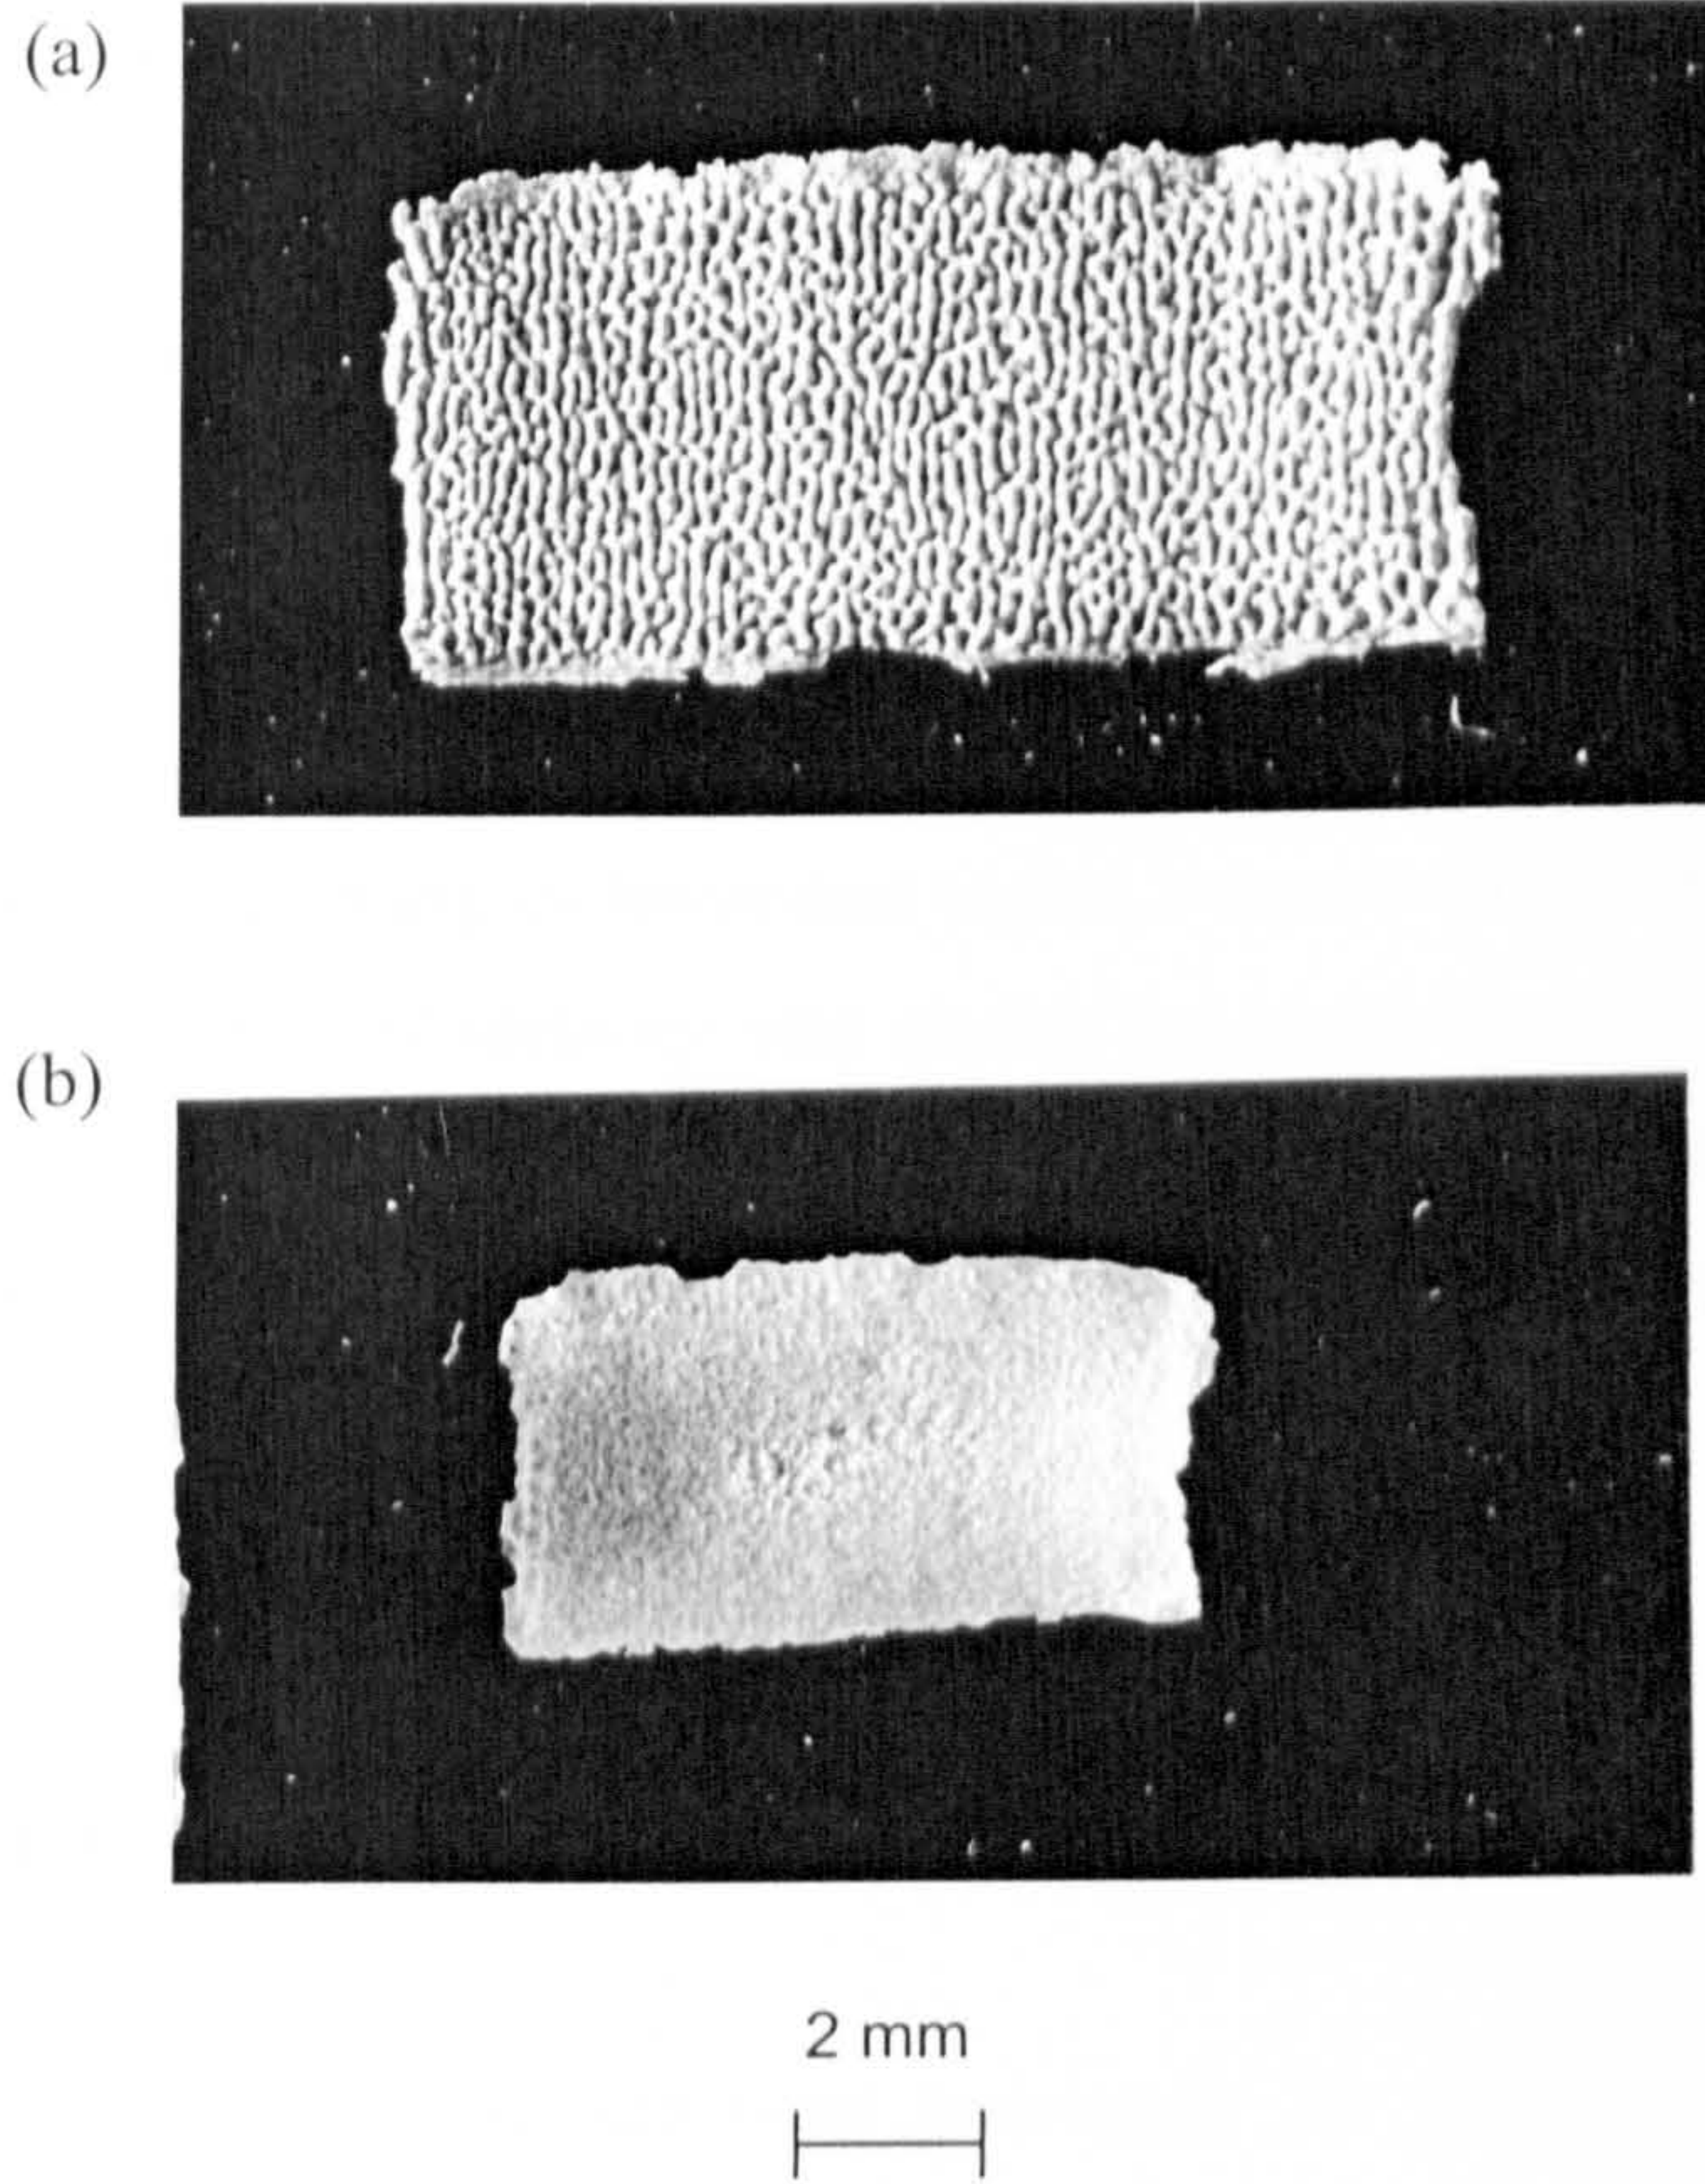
Improved surface quality after sintering (a) green part printed with 1800 layers and (b) sintered part.
